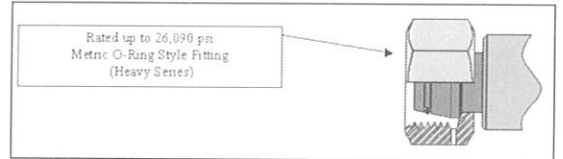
Basic design of European Style DIN 20 (heavy series) Metric O-Ring Fitting
